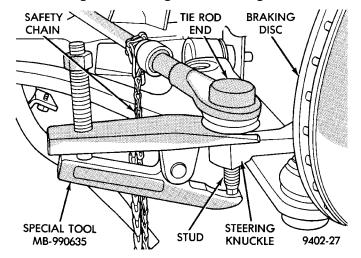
Tie Rod End Removal from Steering Knuckle NOTE: Use caution when separating ball joint stud from steering knuckle, so ball joint seal does not get damaged.
